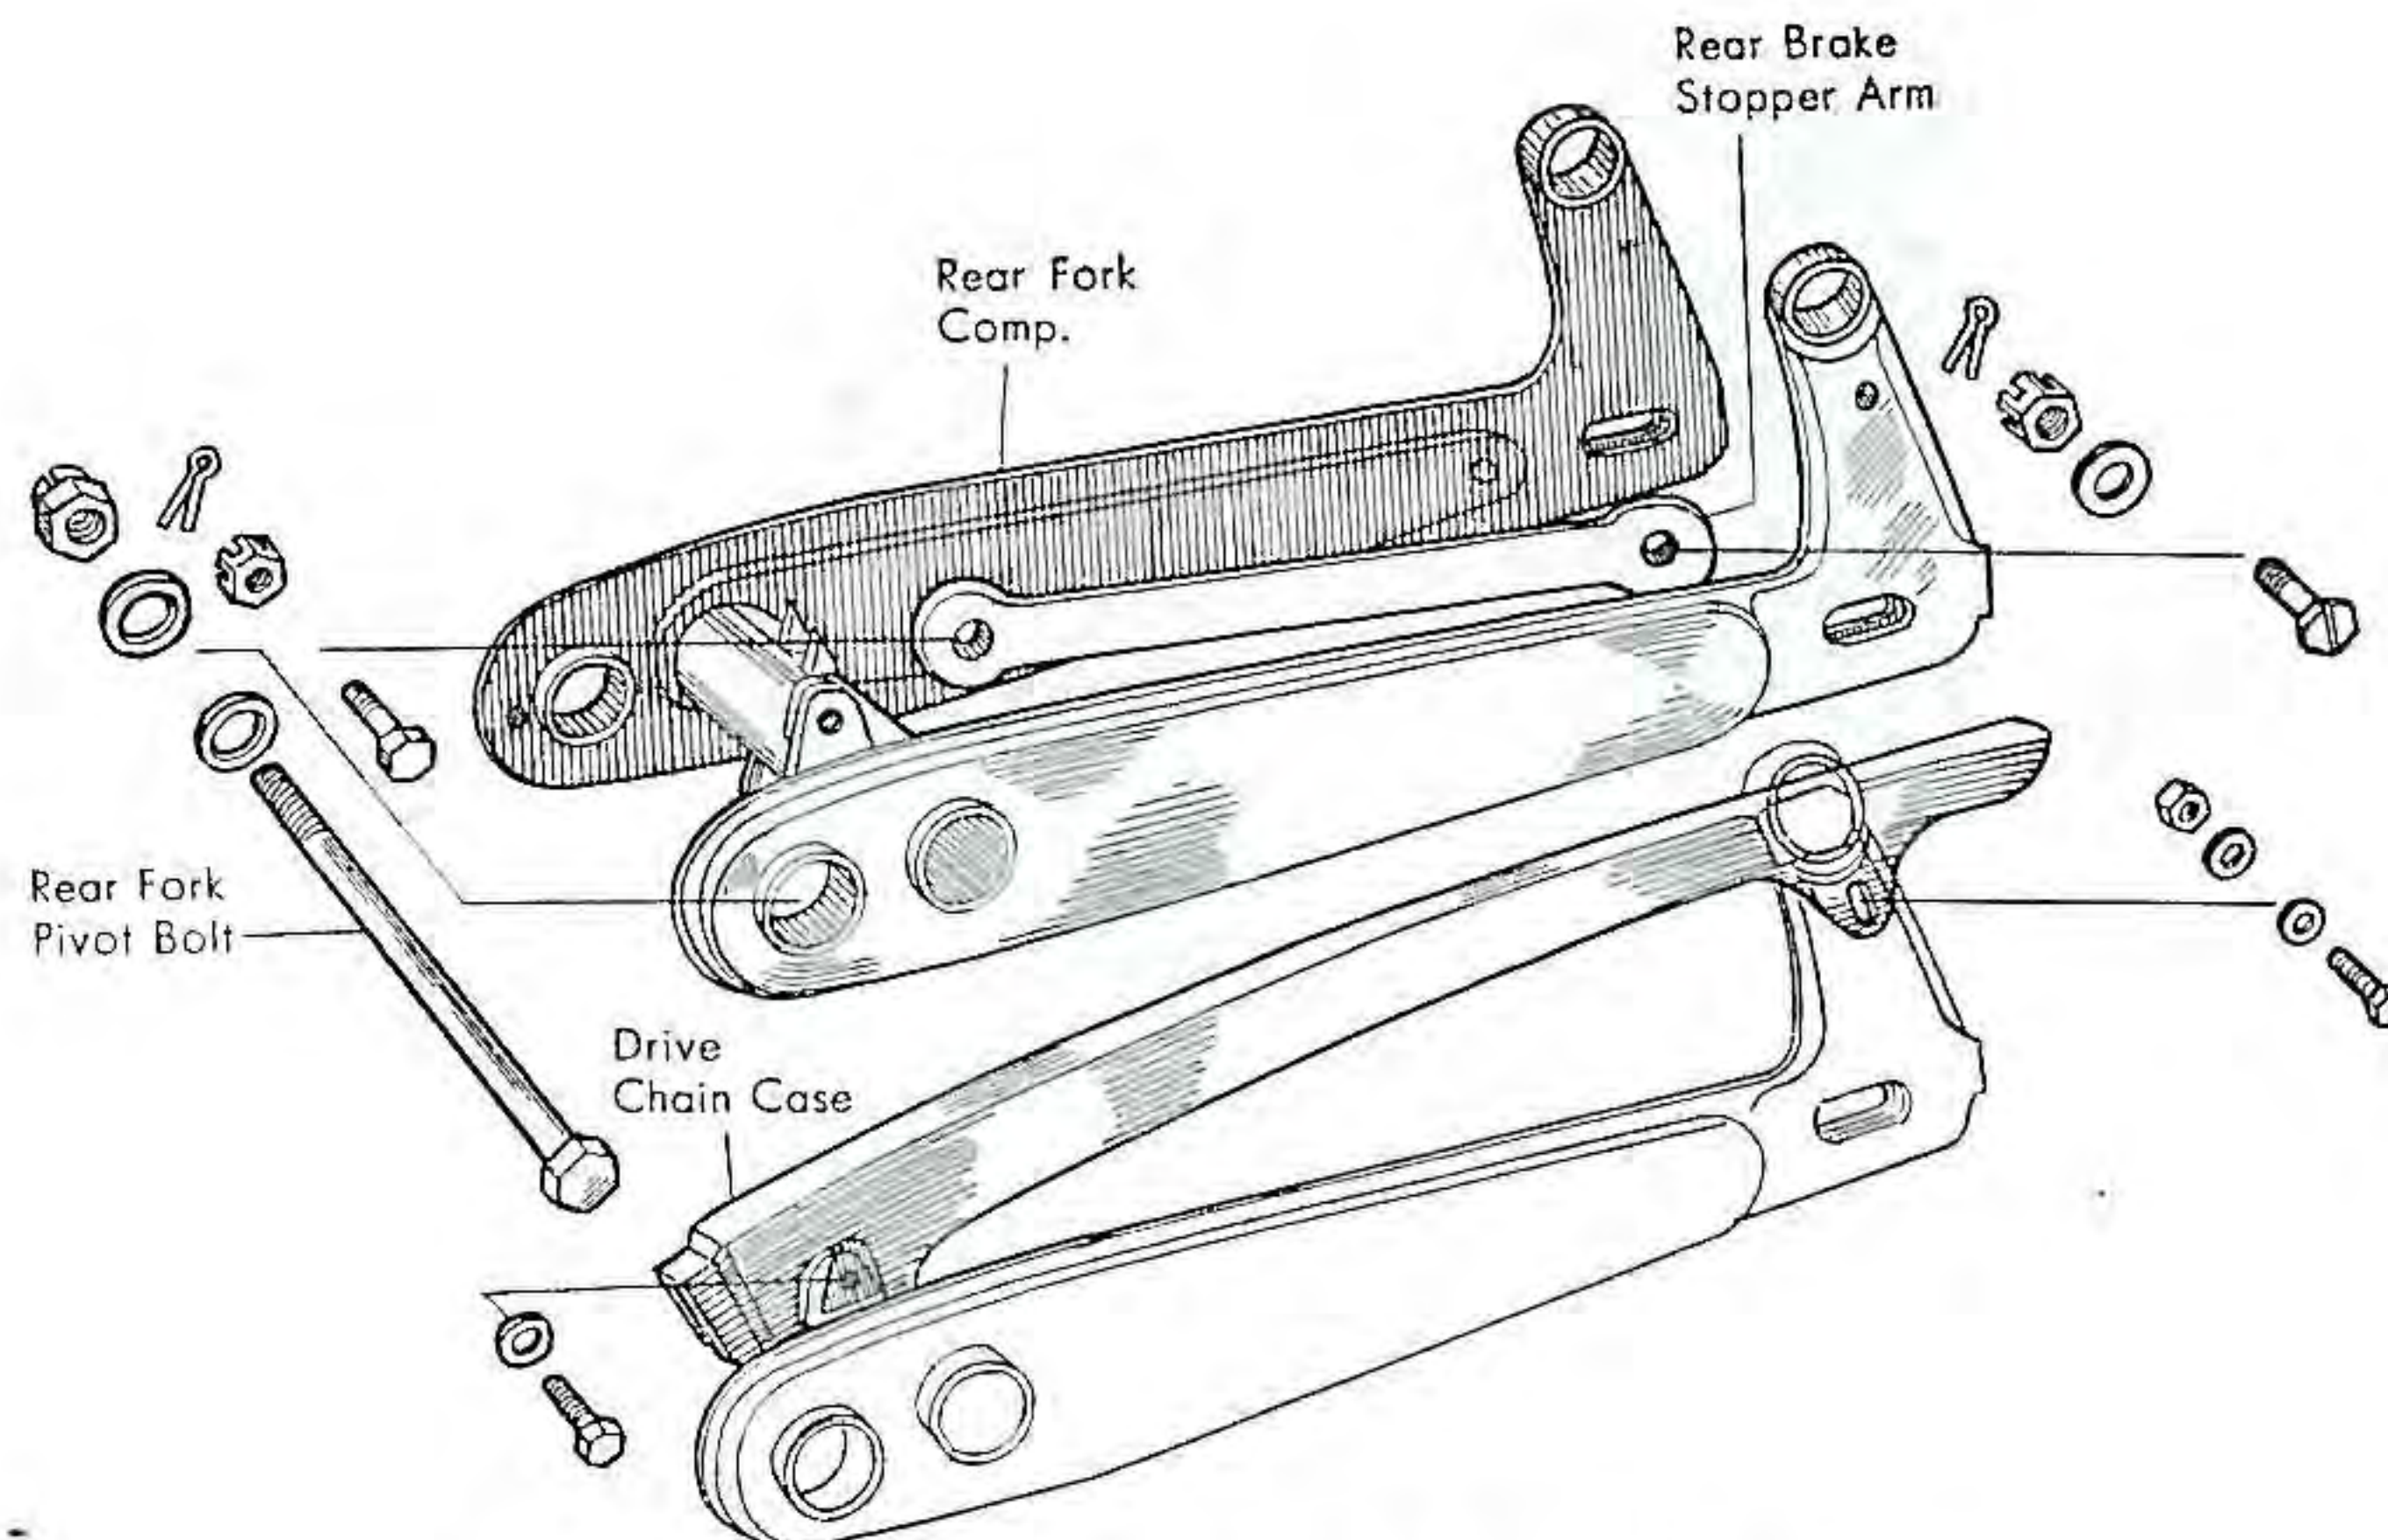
Exploded view of rear fork and chain cover (CB92)
